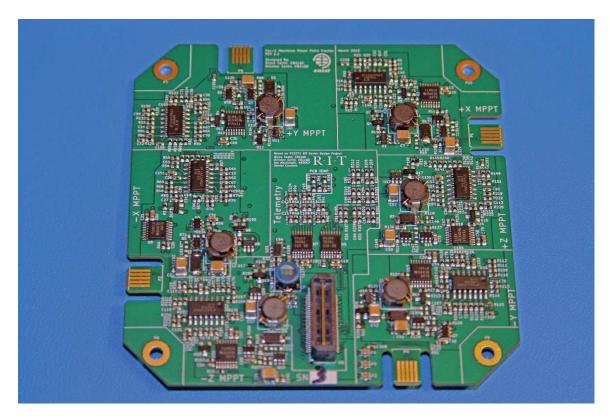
Fox-1 MPPT Rev 1.1 PCB with top layer visible, all components other than stacking connector located on top layer
